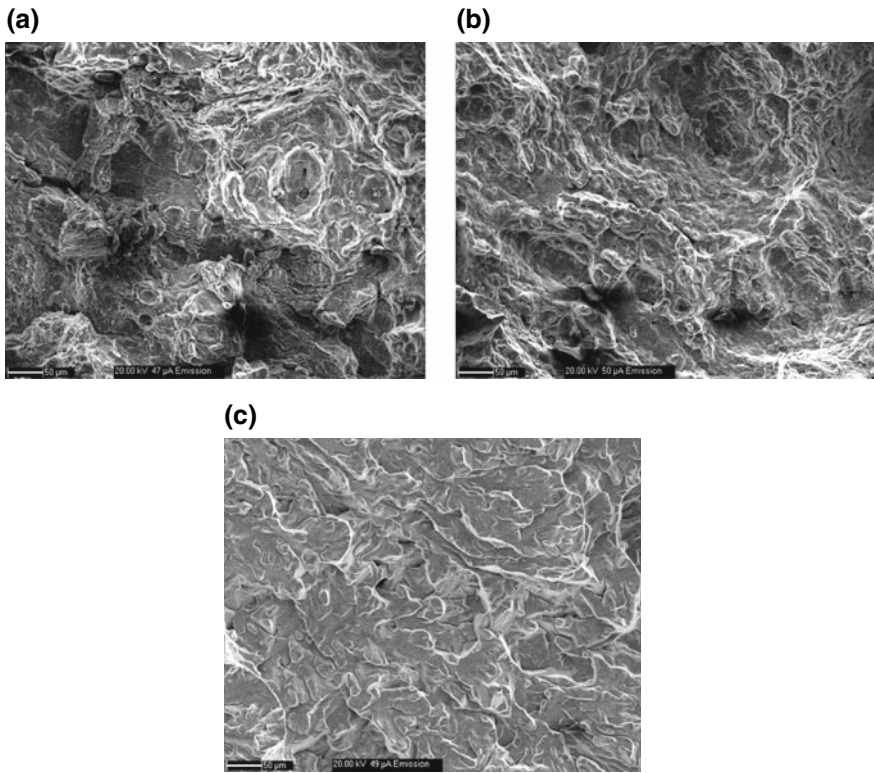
a Fractograph of base metal. b Fractograph of TIG weld. c Fractograph of A-TIG weld
